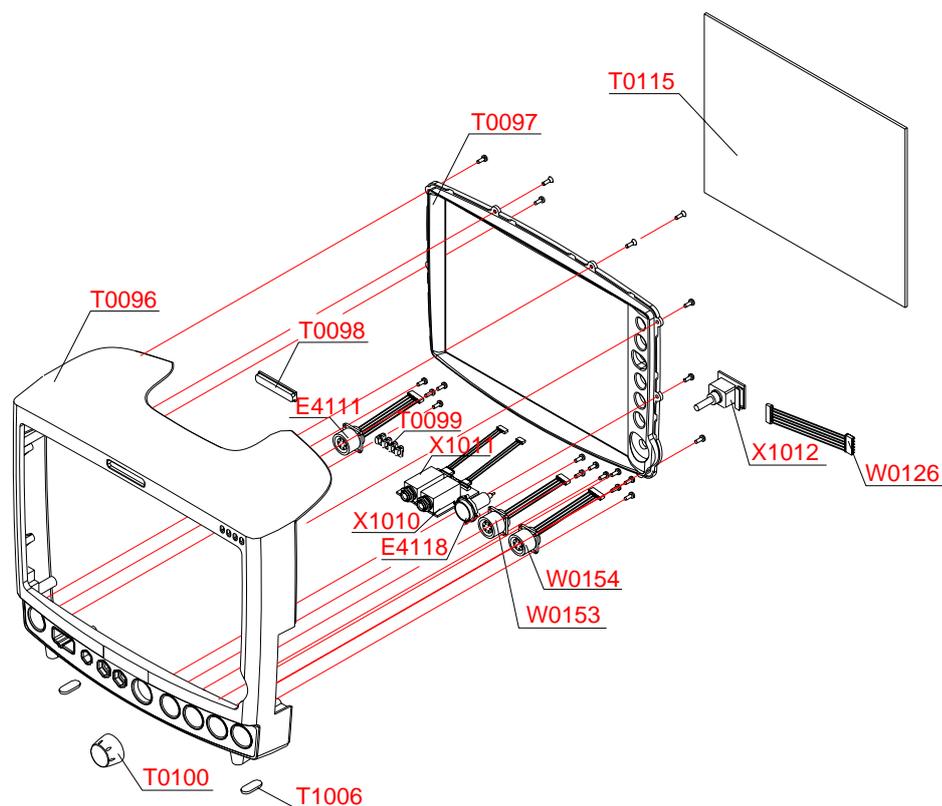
Front Case Disassembly – Knob, LCD window, Encoder assembly and Connectors
